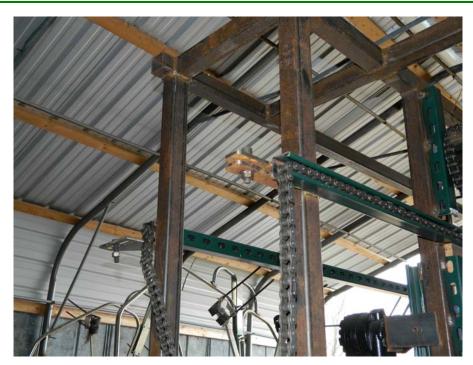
The bine feed section that remains attached to the frame when the machine is broken down for transport. This view shows how the chain is nested inside the Unistrut (although it is rotated about 90 degrees to allow chain to be held in a container for transport.
